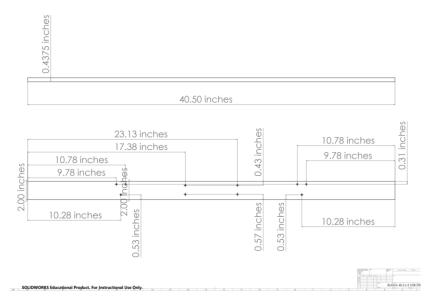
Engineer Drawing of 40.5" x 2 " Wood Piece
